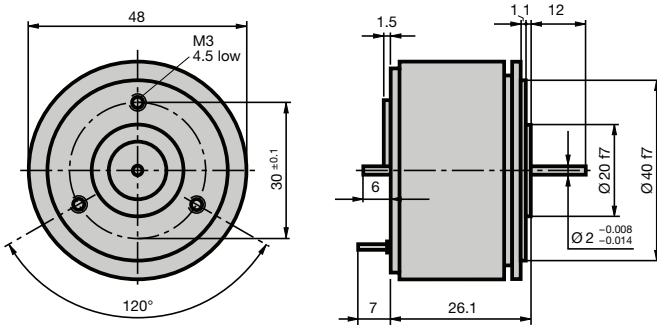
KINAX 2W2 with special shaft drive at front and rear.
